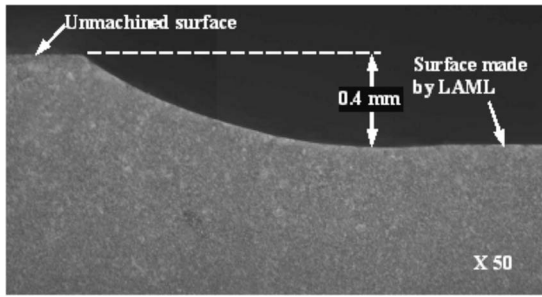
Optical micrograph of a section view for a workpiece produced by LAML
